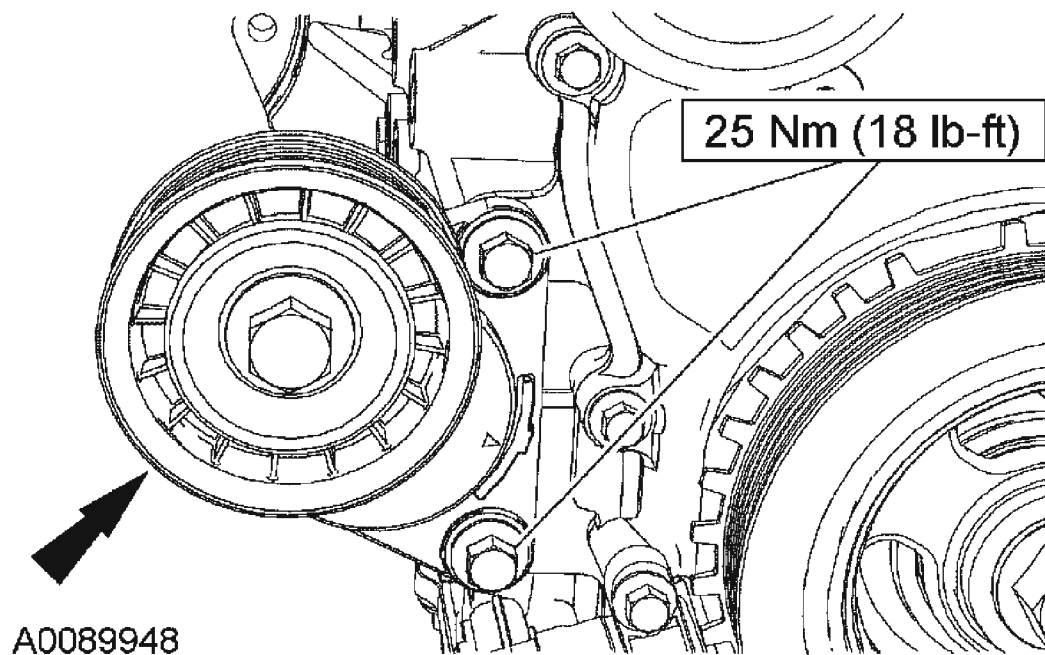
Installing Accessory Drive Belt Tensioner And Bolts
